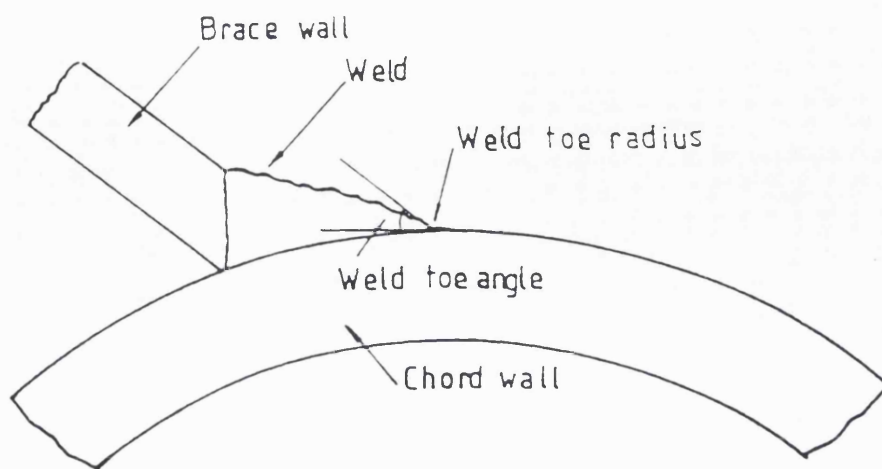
Geometric Parameters of Weldments(Niu 1987)
